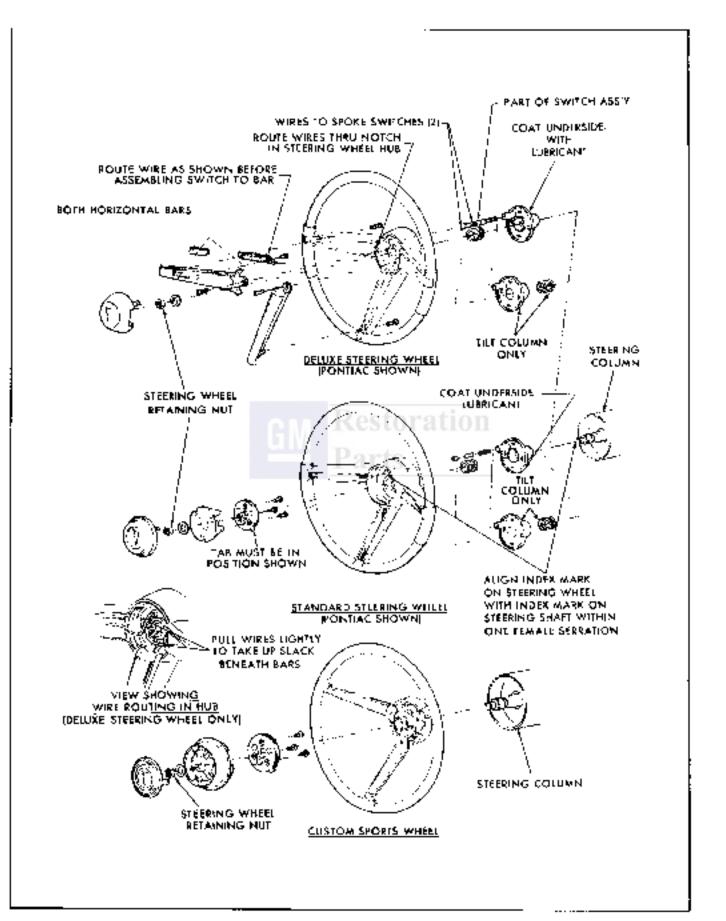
Expiaded View of Stearing Whee and Morn Button
